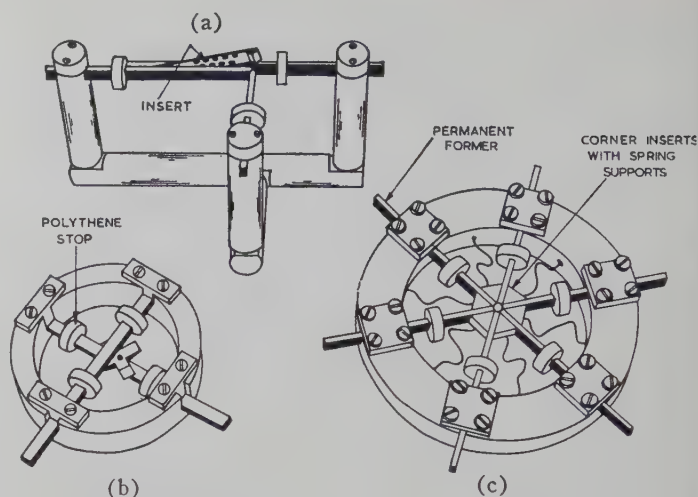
Miscellaneous assembly jigs; (a) multiple-hole directional coupler, (b) cross-over directional coupler, (c) hybrid ring, two of the arms being finally plugged.
